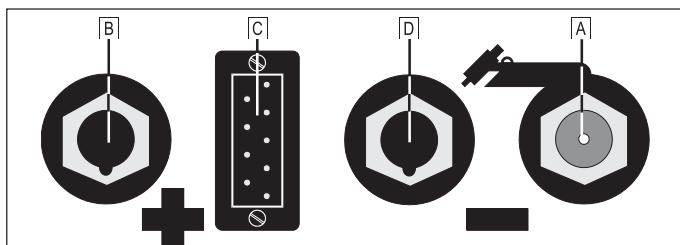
Design with central welding torch connection GWZ: Connection points on front of machine
